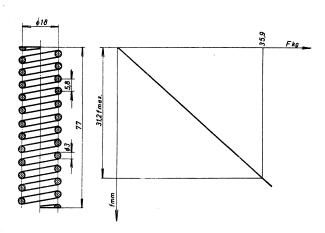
STRIKER SPRING Material: Patent wire 160—180 kg/mm²
